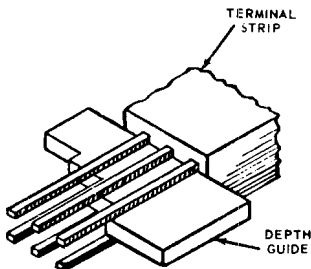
Method of Using Depth Guide for Soldered Connections on Terminal Strips
